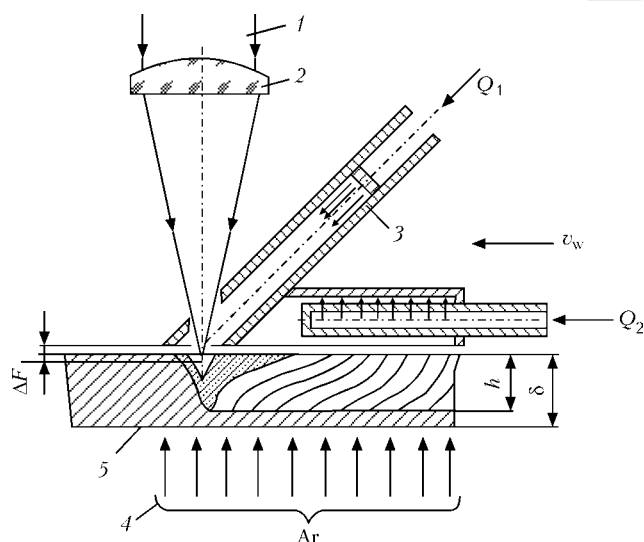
Scheme of laser welding with differentiated shielding of the weld pool and cooling metal by laminar gas flows
